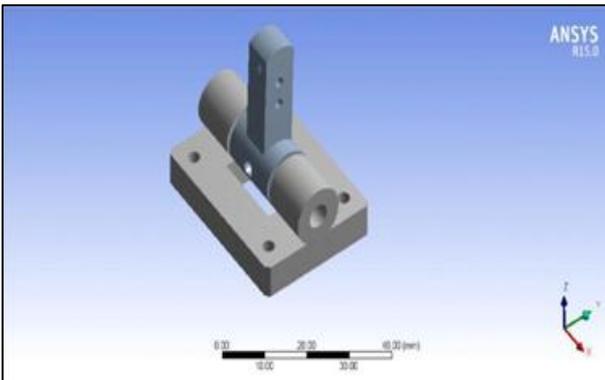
Modelled Steering Seat Base and Arm Assembly for CF PLA
